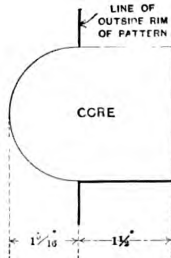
Showing Projection of Core Print upon the Pattern.
